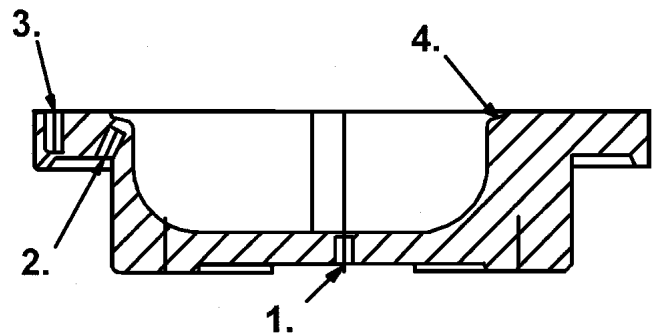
Cross-sectional illustration of the piston head designed for the test engine: (1-3) sites for temperature probes (Templugs) and (4) machined chase for TTBC coating
